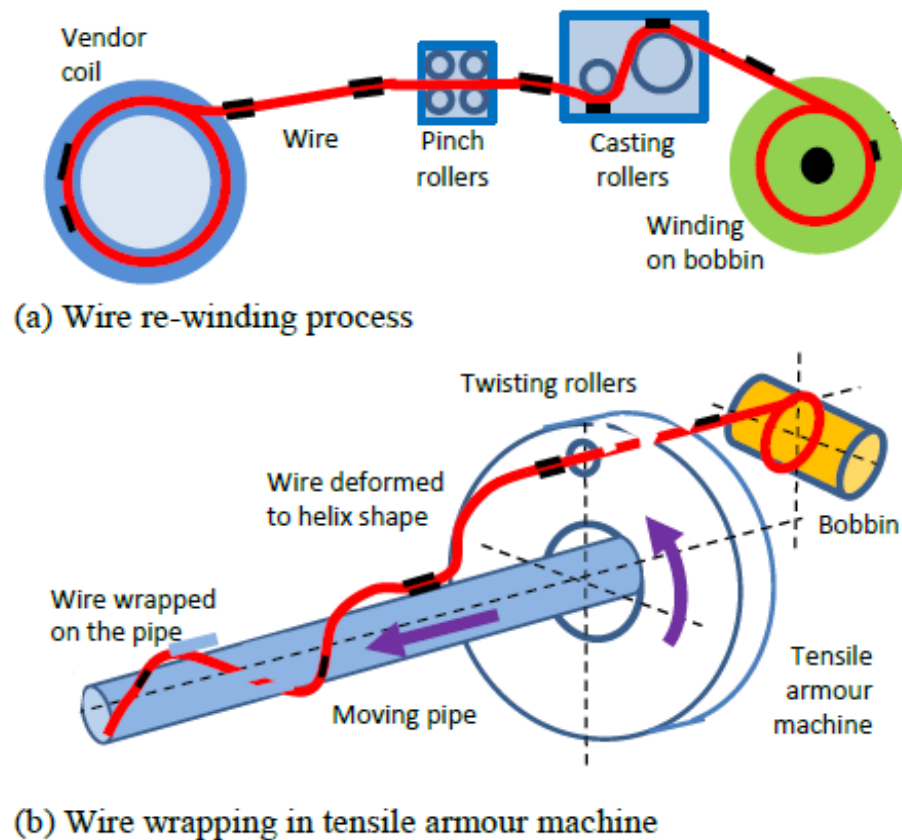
Fabrication Process for the tensile armor. a) Wire-rewinding; b) Wire wrapping in the tensile armor machine. (Adapted from [4]).
